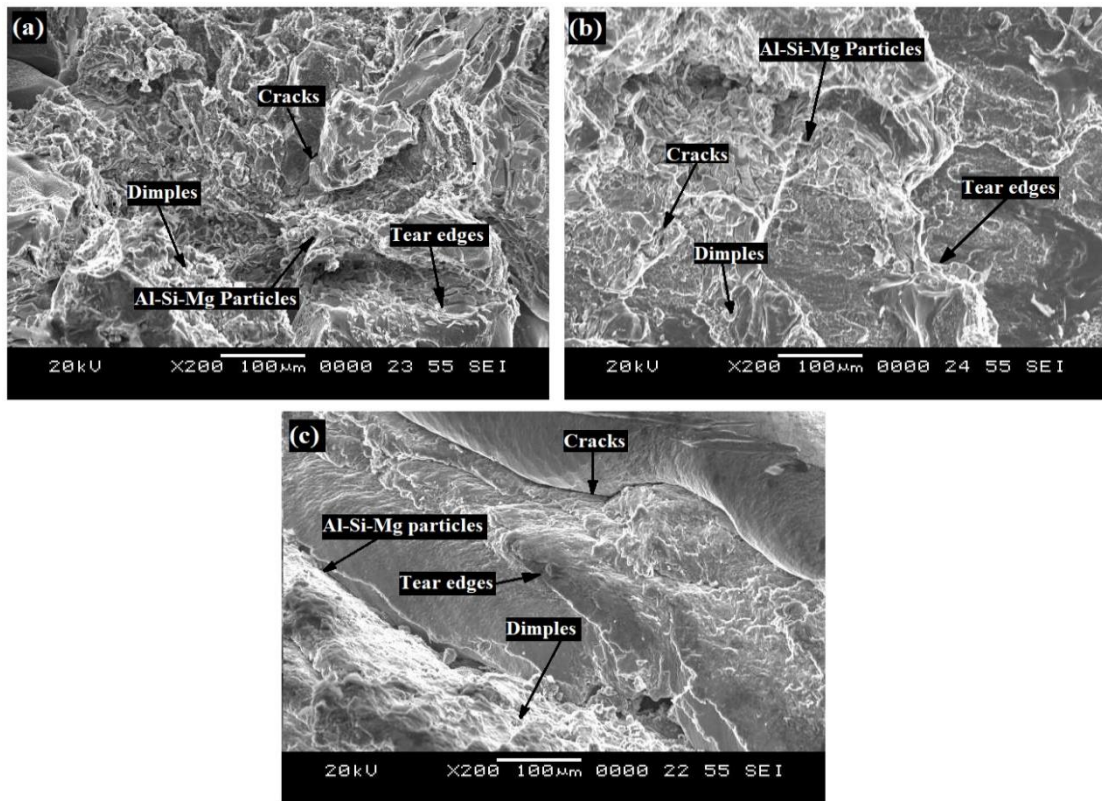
SEM images of tensile fracture surface of Al-10Mg-8Ce-3.5Si aluminium alloy joints friction stir welded at a speed of tool rotation of 1000 RPM and a welding speed of 20 mm/min using; (a) Triangular profile pin (TPP) tool, (b) Square profile pin (SPP) tool and (c) Circular / Round profile pin (CPP) tool.
